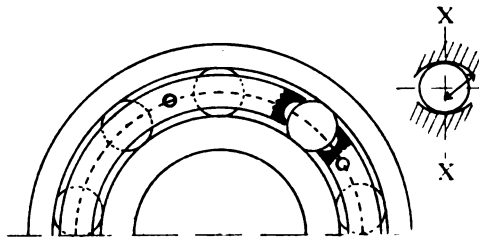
"RADIAL" BEARING WITH BALL CAGE.
